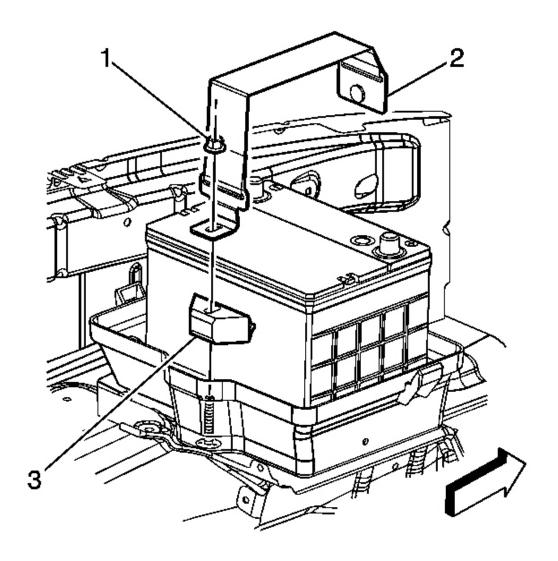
Battery Strap & Nut Courtesy of GENERAL MOTORS CORP.
